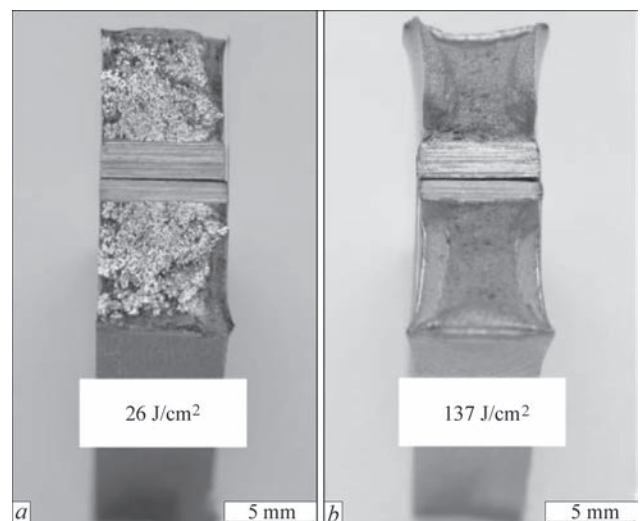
Broken impact testing specimen; with coated edges (a), without coating (b)
